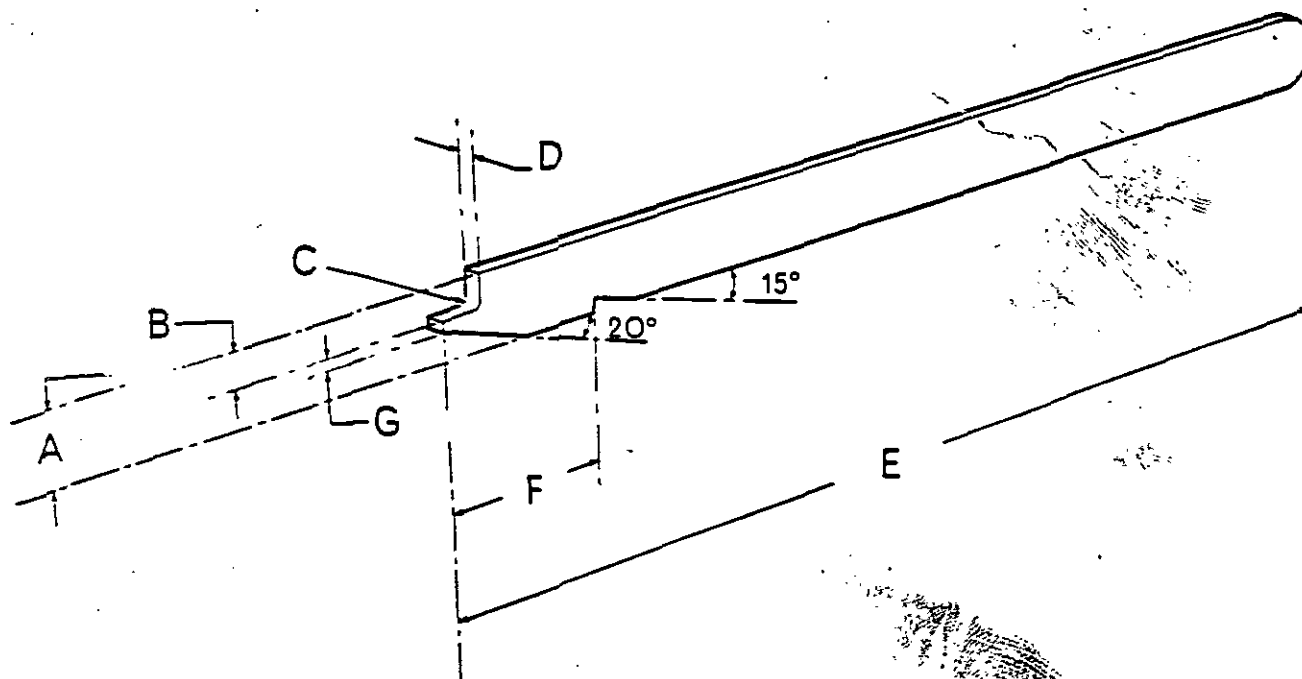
ANTI-RATTLE SPRING REPLACING TOOL
